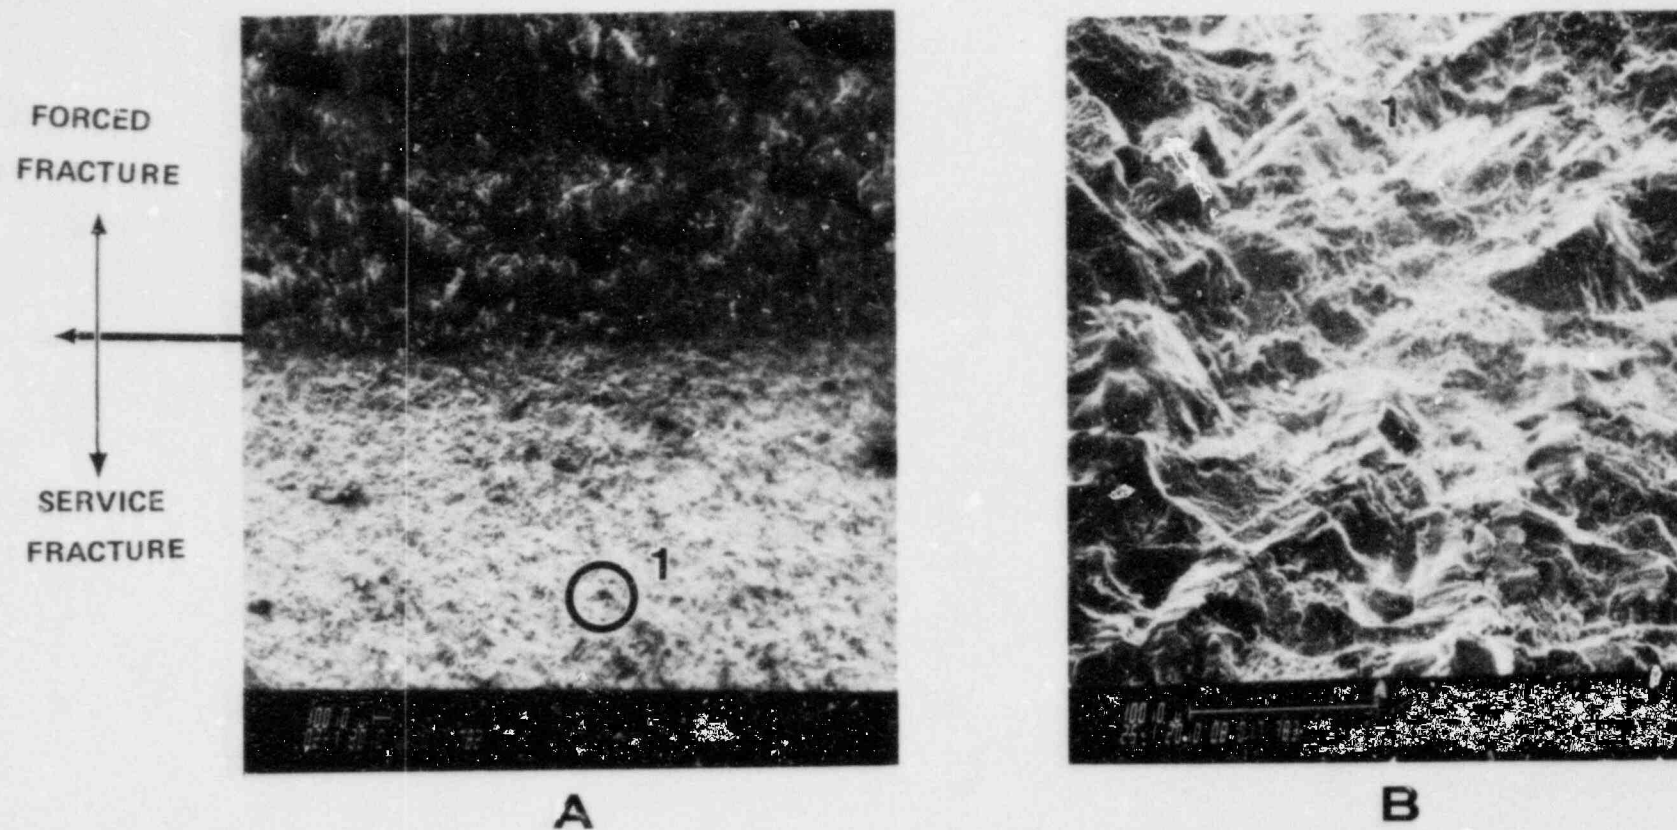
Typical Fracture Structure on Specimen 17-20.
